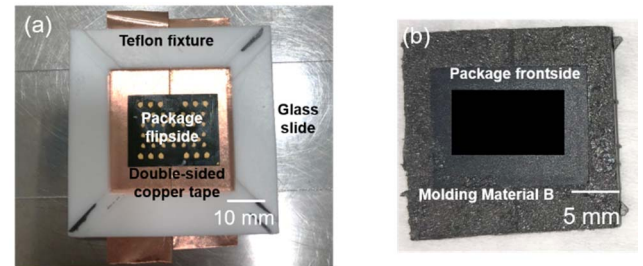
(a) Setup for encapsulation of 3D four-die stacked package in Molding Material B and (b) cured sample (note that the line at the centre of Molding Material B was due to the two vertical pieces of double-sided copper tape placed side by side for mounting of the package onto a piece of glass slide for flatness, it is not a crack in the molding material)
